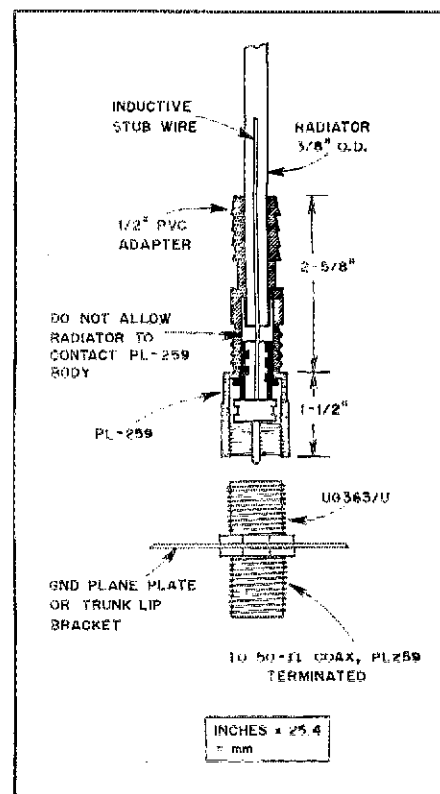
This drawing shows a cutaway view of the antenna assembly. A PVC pipe adapter allows simple and inexpensive construction.
